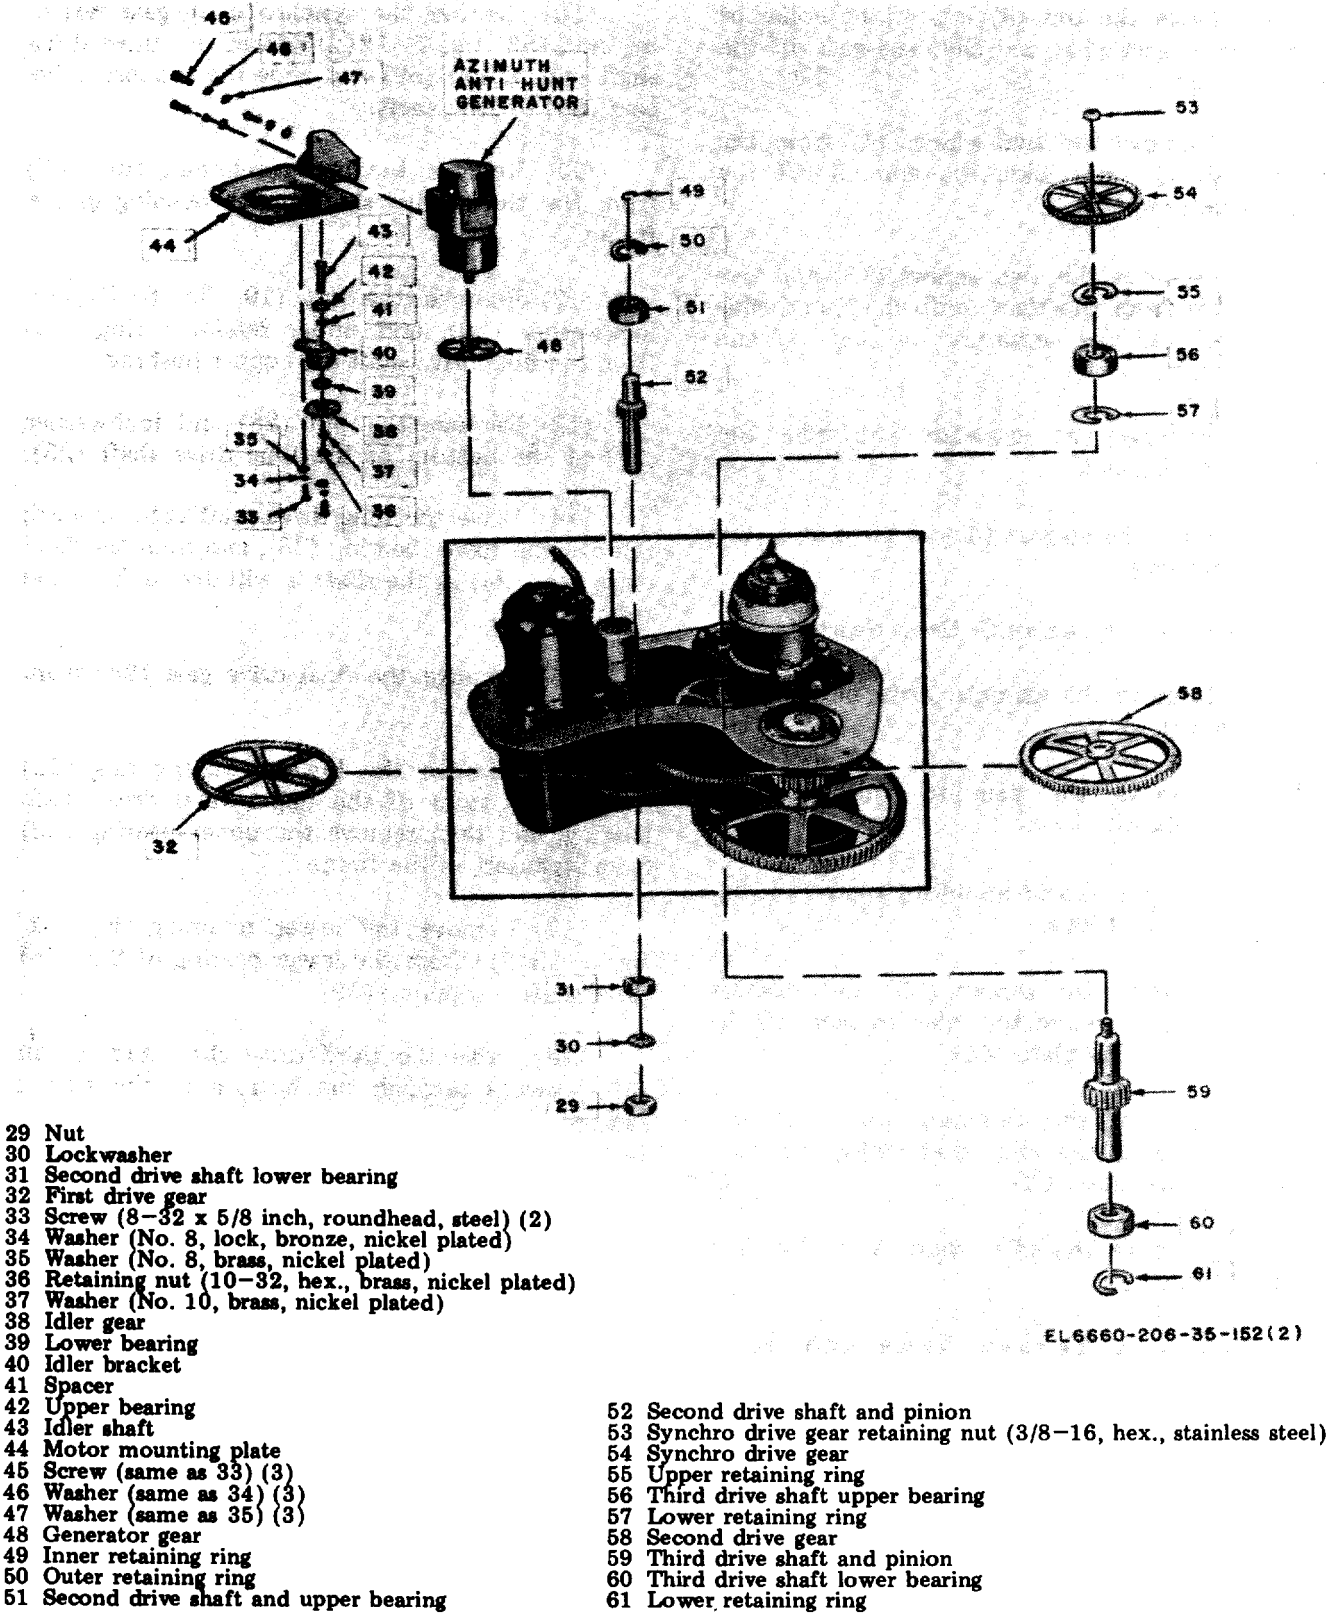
(1). Azimuth drive assembly, exploded view (sheet 1 of 2).
